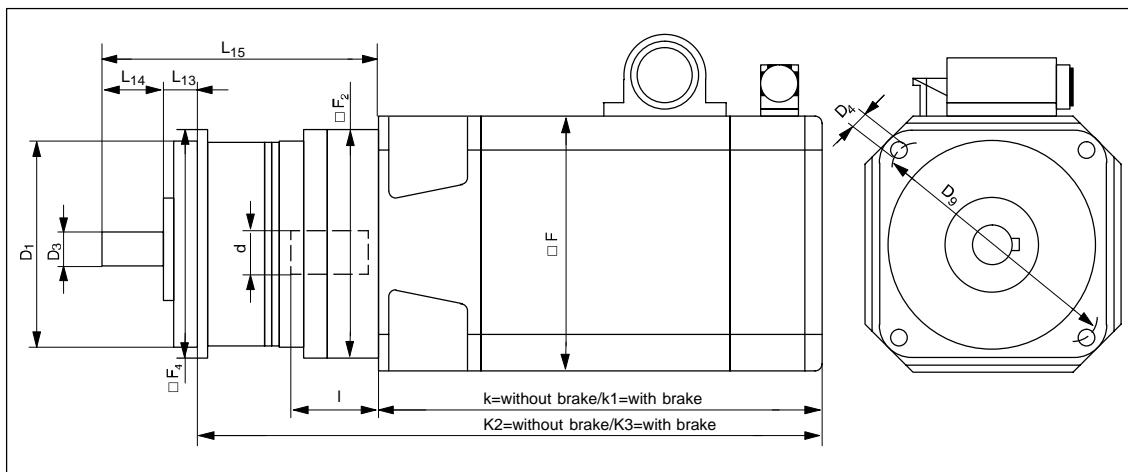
1FT6 series with 2-stage planetary gearbox (alpha company), dimensions refer to Table 3-13
